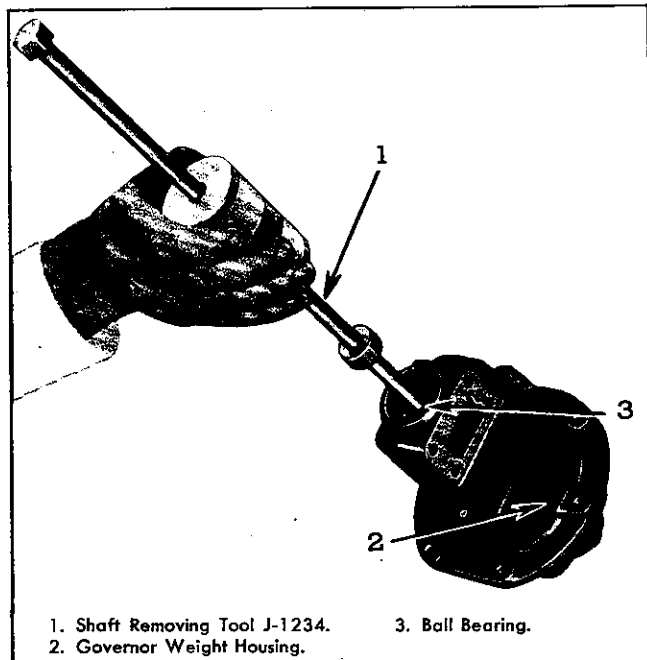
Removing Weight Carrier Shaft from Ball Bearing with Tool J-1234.
